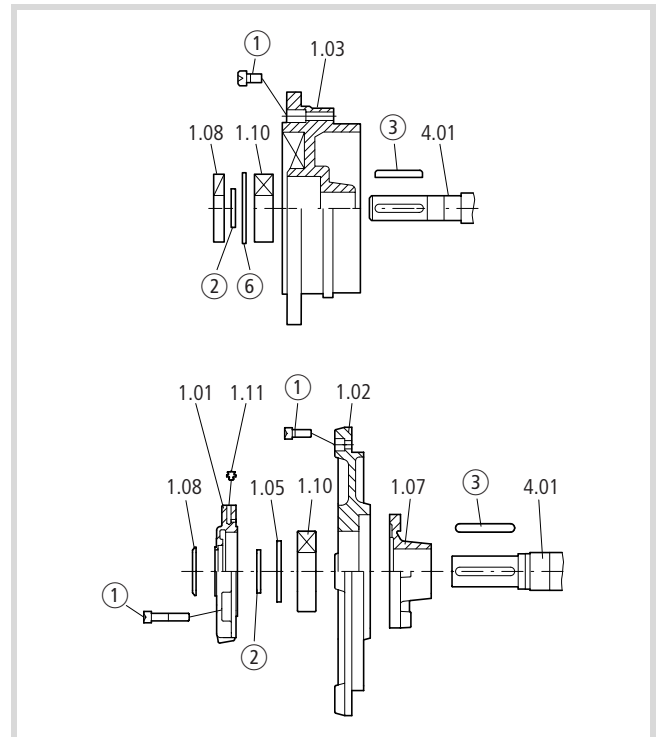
Position of DE shaft seal (1.08) and external DE bearing cover (1.01)
